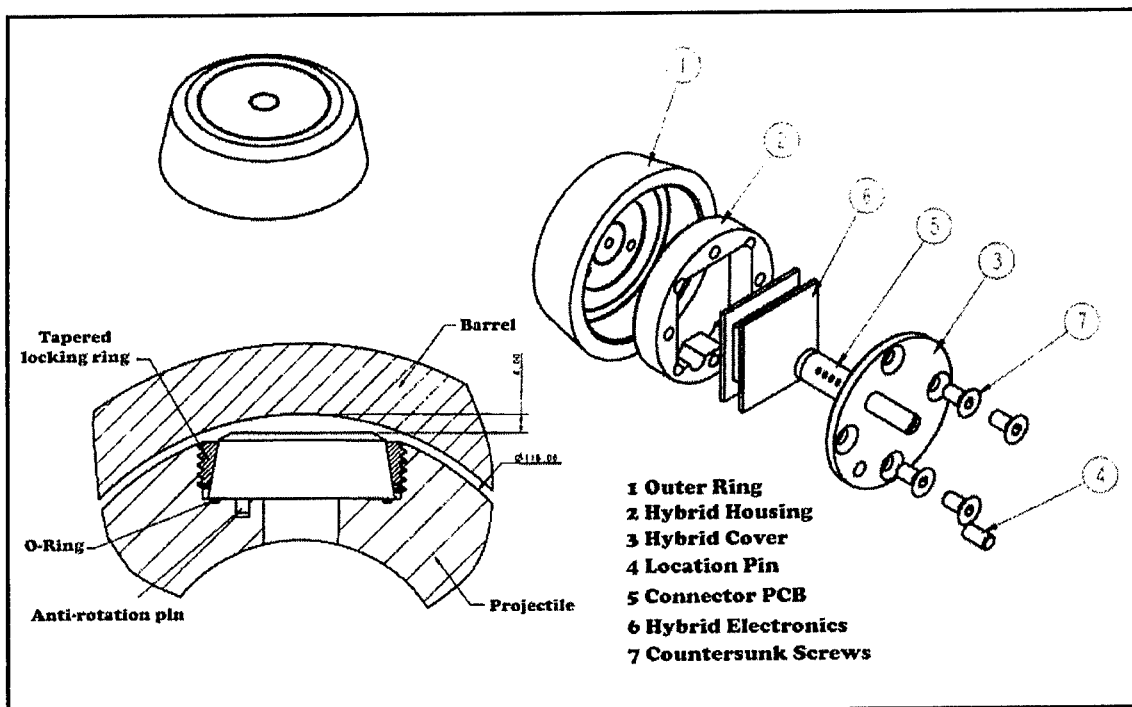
Exploded view of displacement transducer and detail of assembly into projectile.
